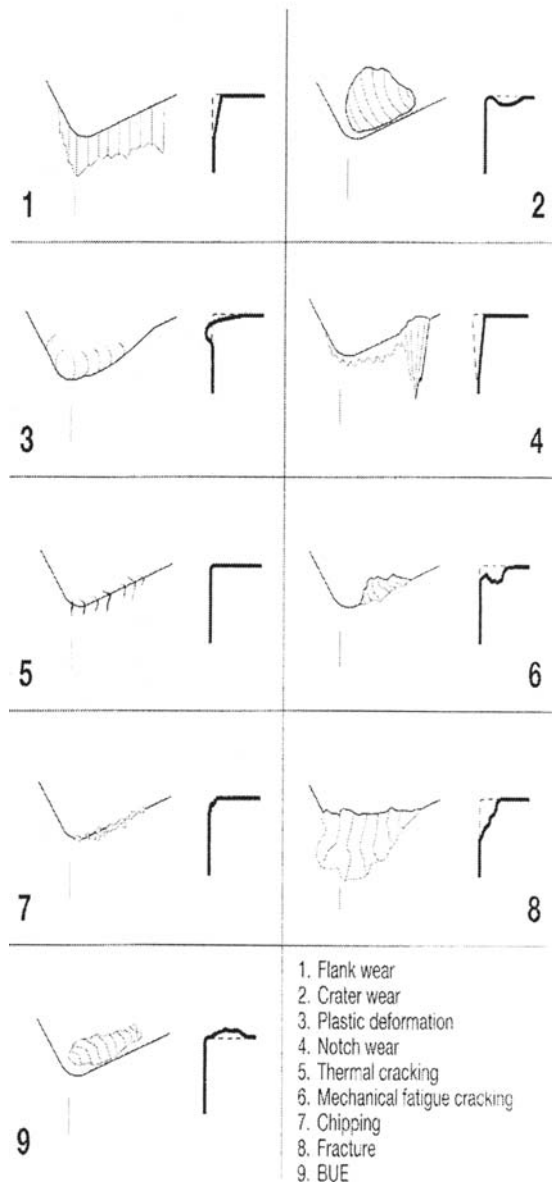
Classification of cutting tool wear caused by a combination of different tool wear mechanisms (Ref 1)
